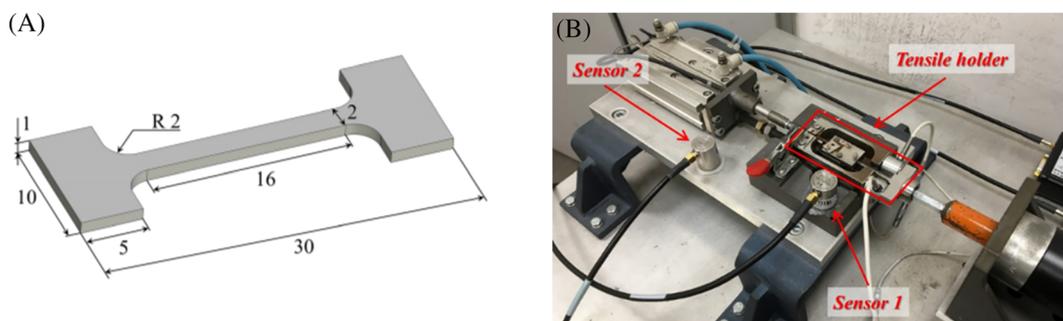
(a) Geometry of microtensile specimens, and (b) testing set-up
